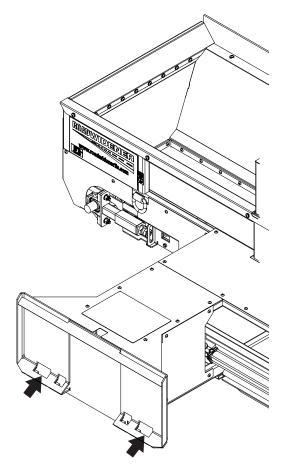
Universal Mounting Pad on Road Widener (Arrows Indicate Skid Steer Attachment Points)
